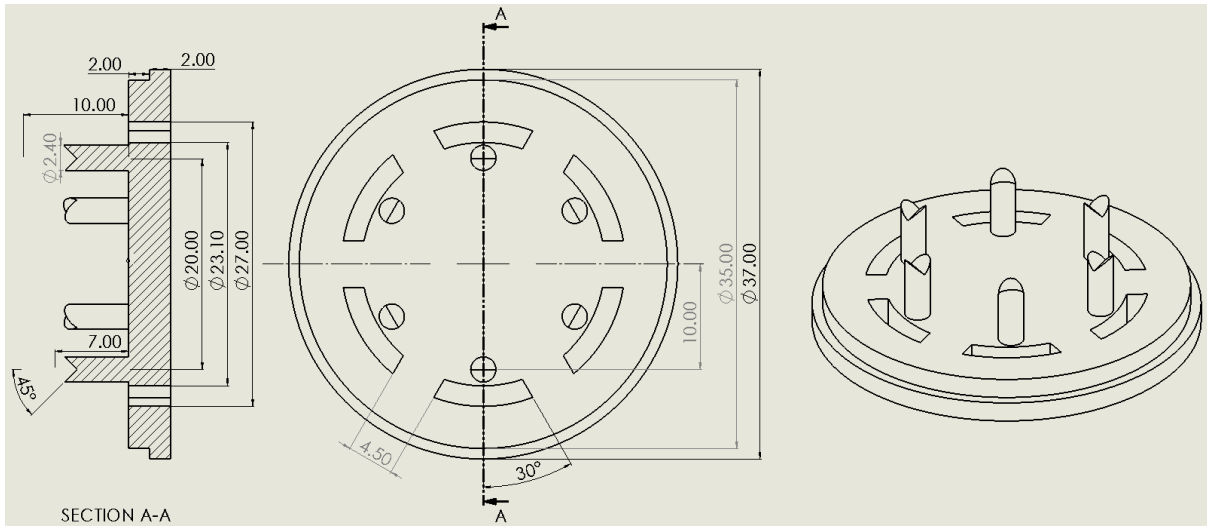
Support structures on the mould for valve with thin tube control chamber. From left to right: a) cross-section b) top view c) isometric view. Support structures are placed behind the valve ports.
